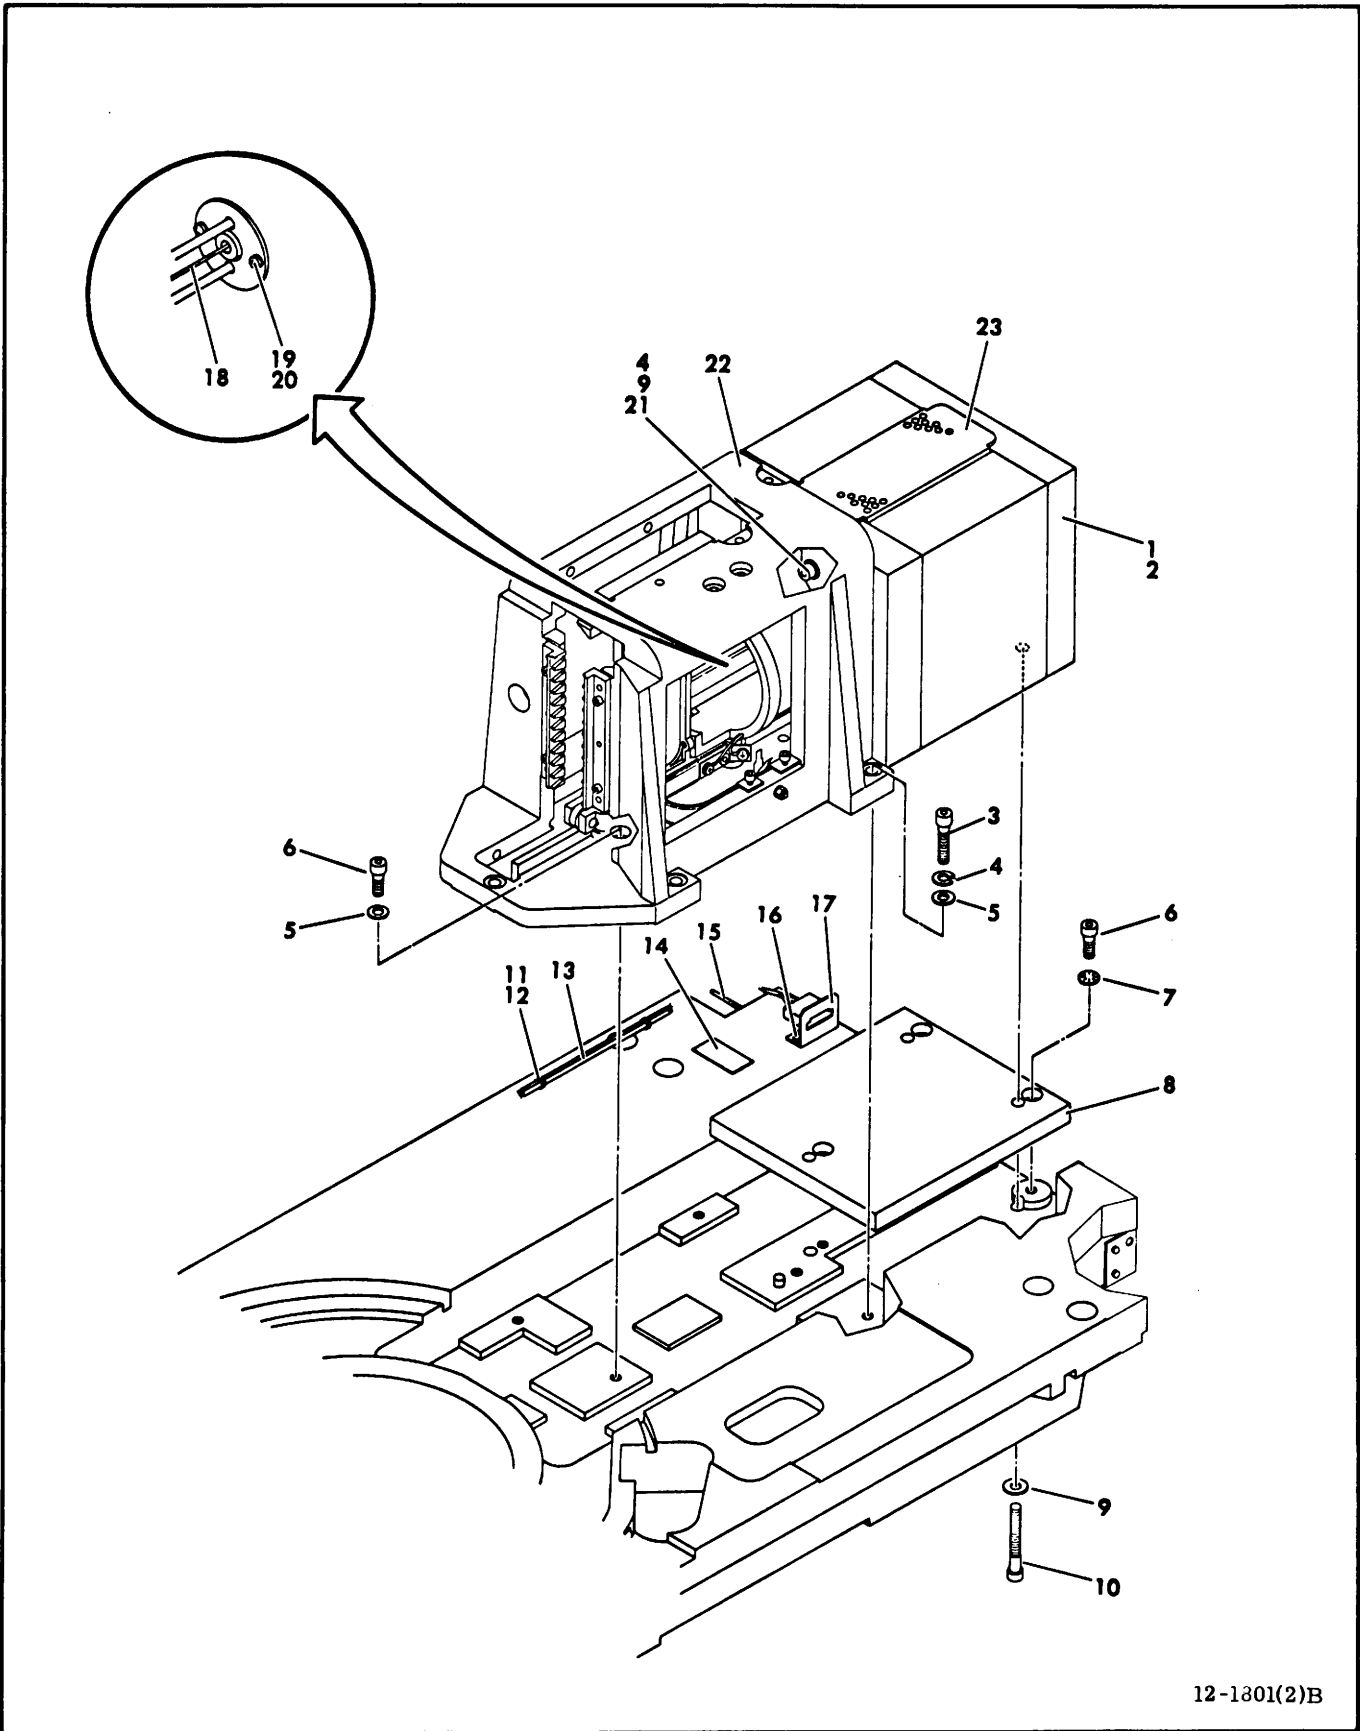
DECK ASSEMBLY (SHEET 1 OF 3)
